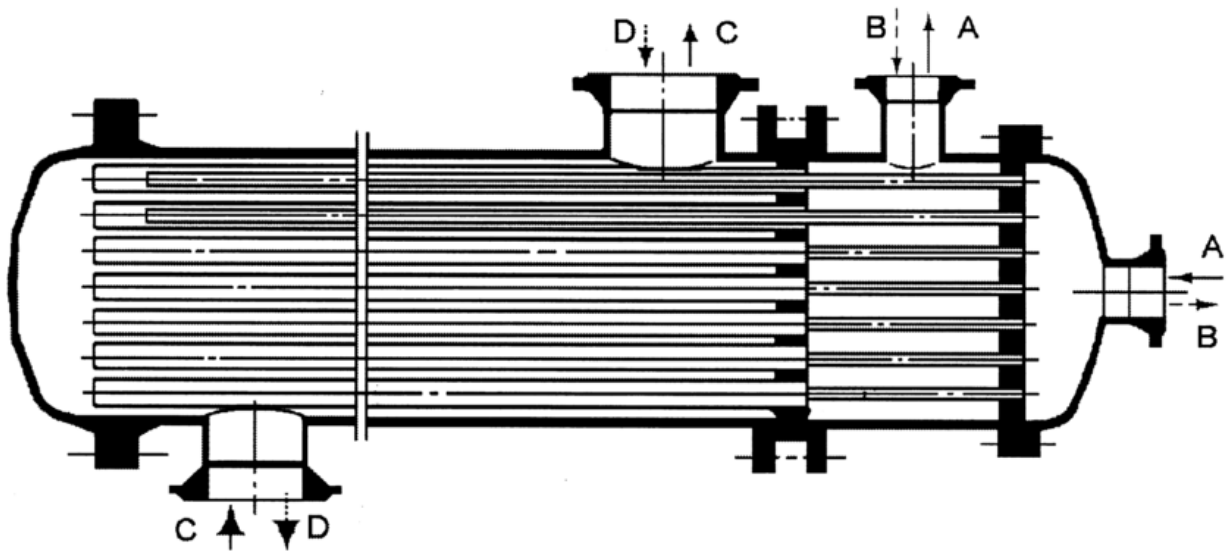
Bayonet Tube Heat Exchanger [4]
